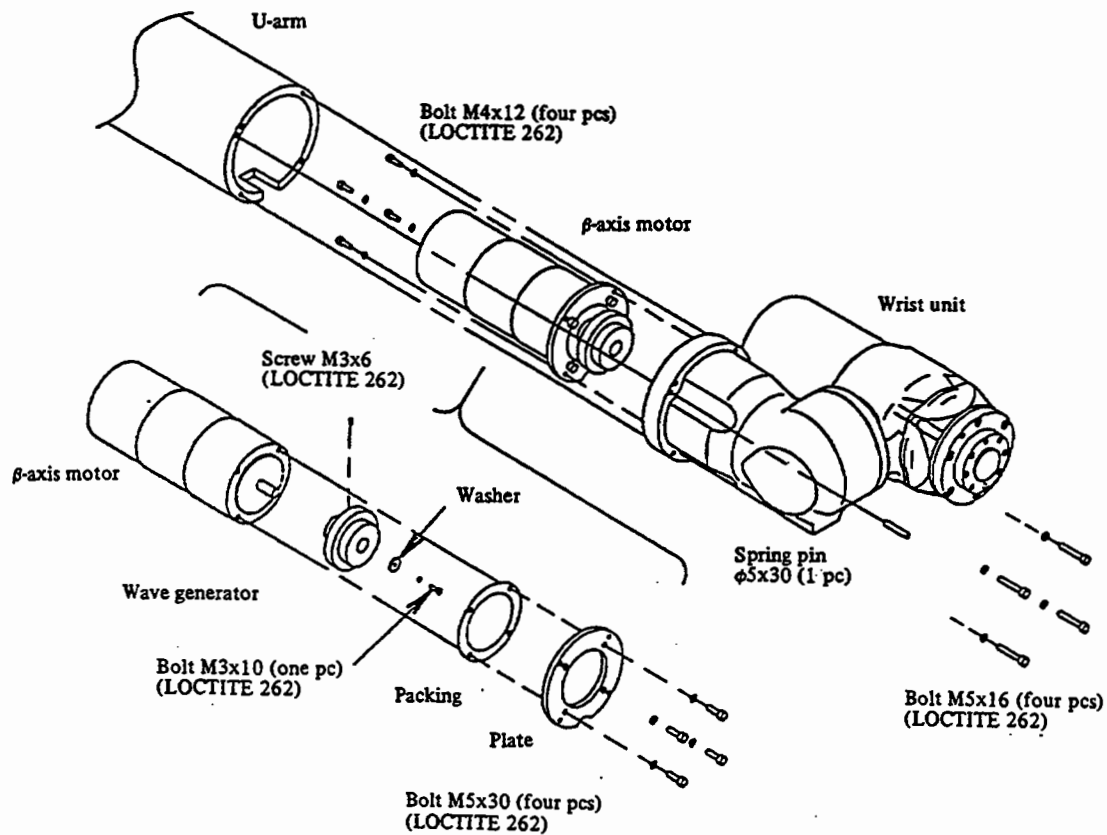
(a) Replacing β -axis motor (S-10)
